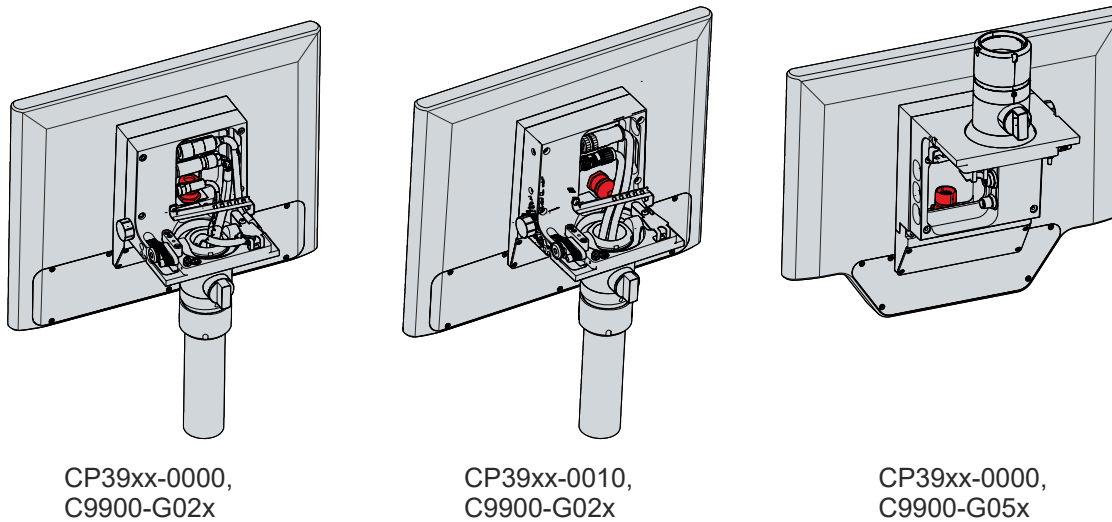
M20 cable gland and 19-pin round connector with mounting arm adapter
